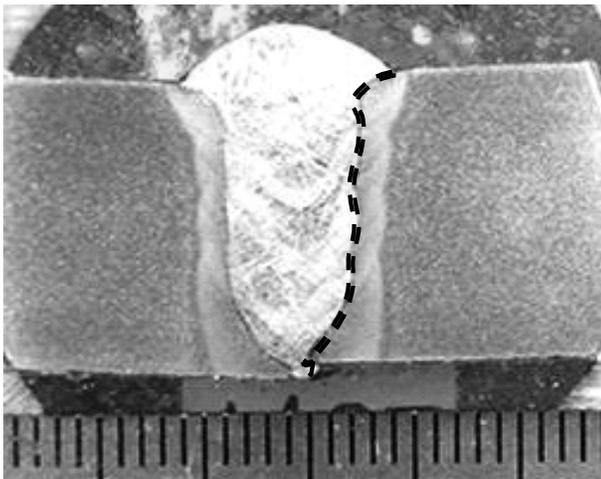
Typical macrostructure of welding portion and location of hardness measurement.
